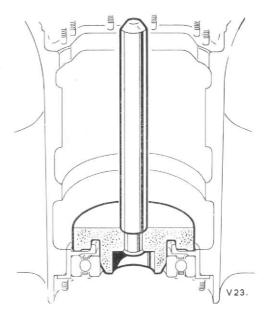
Extractor T.72479, for pressing front bearing assembly out of air-intake casing.
